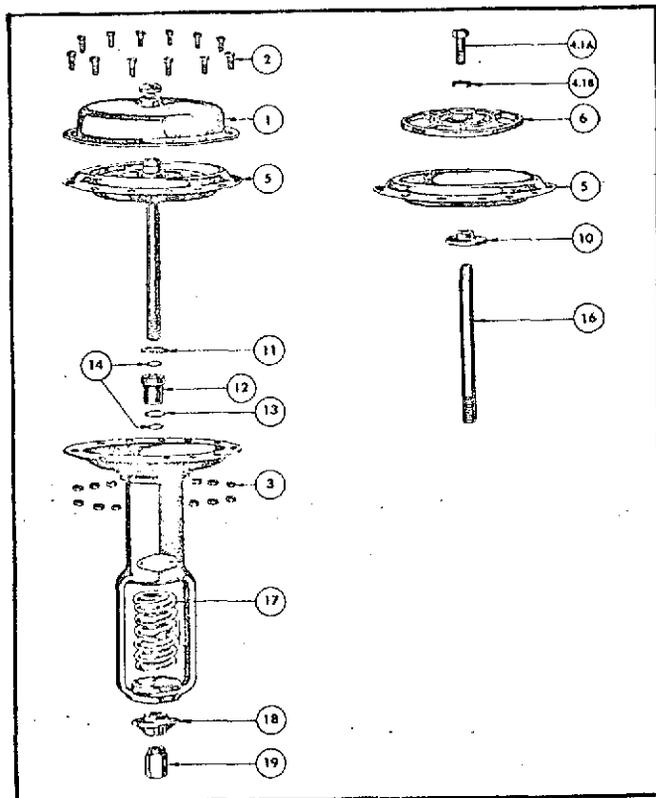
Exploded views of Type 667 actuator and diaphragm plate-actuator stem assembly.
